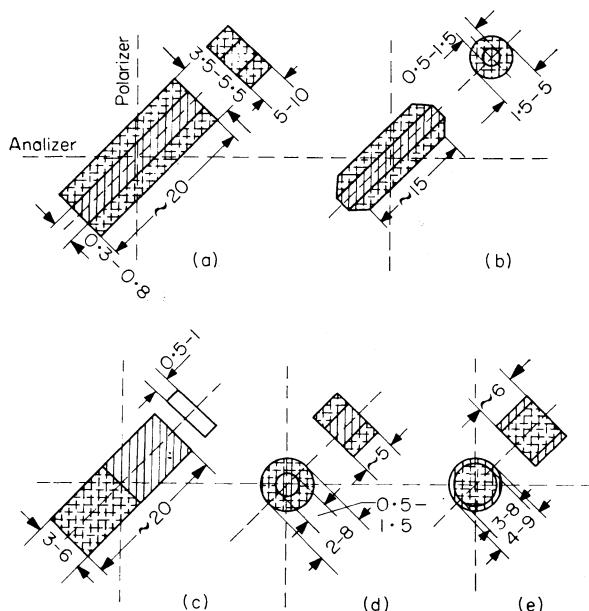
Recommended shapes and dimensions of glass-metal samples for strain analysis; (a) metal plate sealed between two glass plates; (b) wire sealed into glass tube; (c) butt-sealed metal and glass plates; (d) metal wire sealed into glass ring; (e) glass window sealed into metal ring
